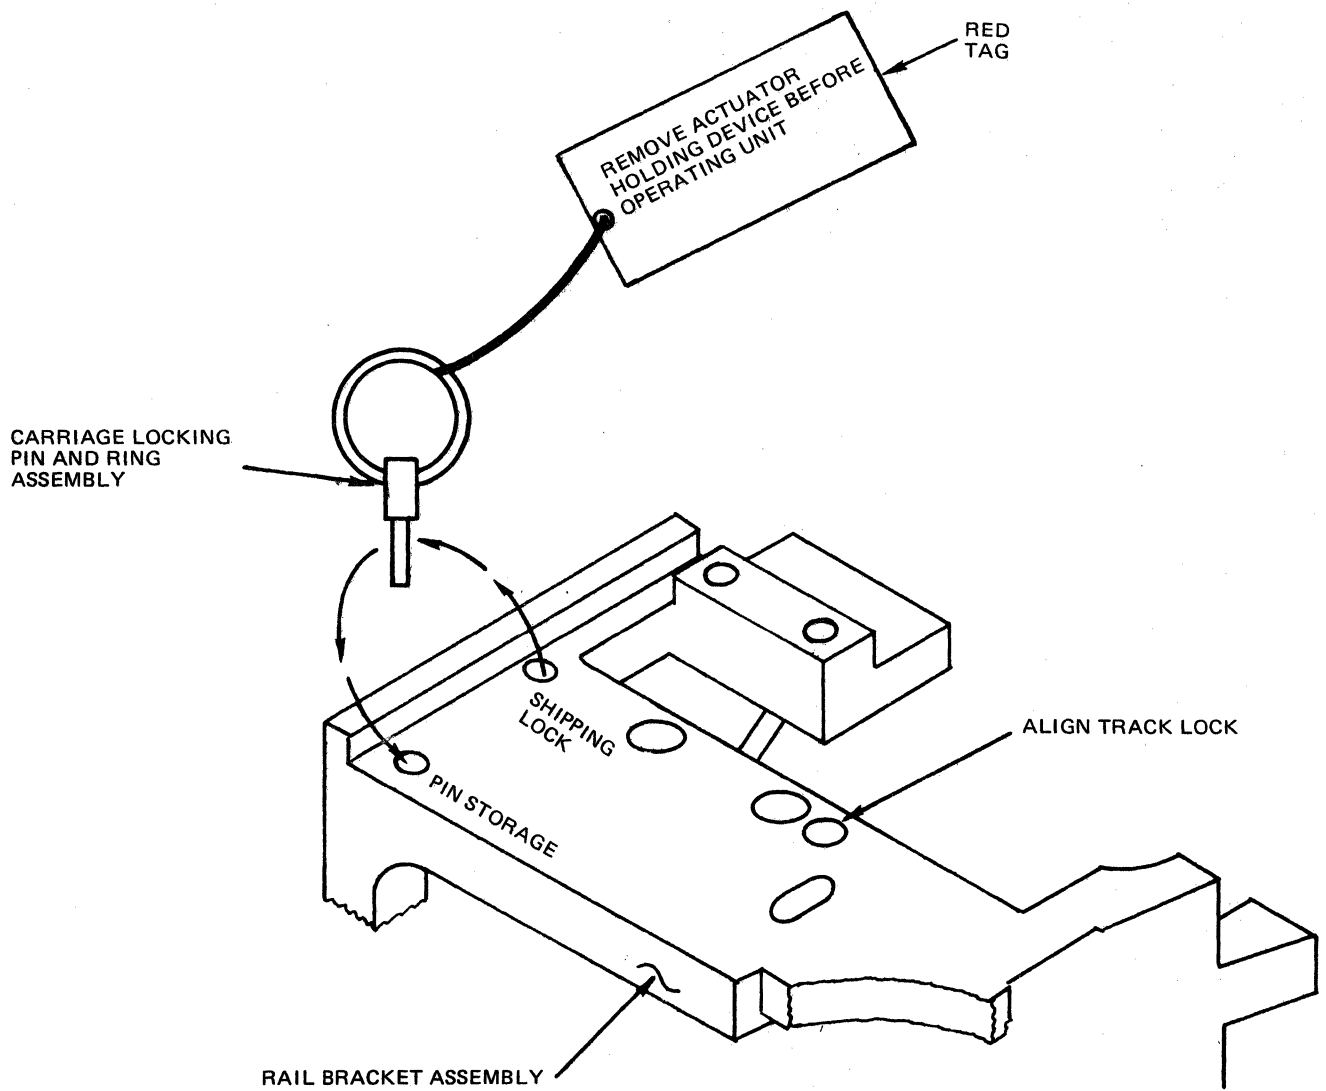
Removal of Carriage Locking Pin and Ring Assembly
